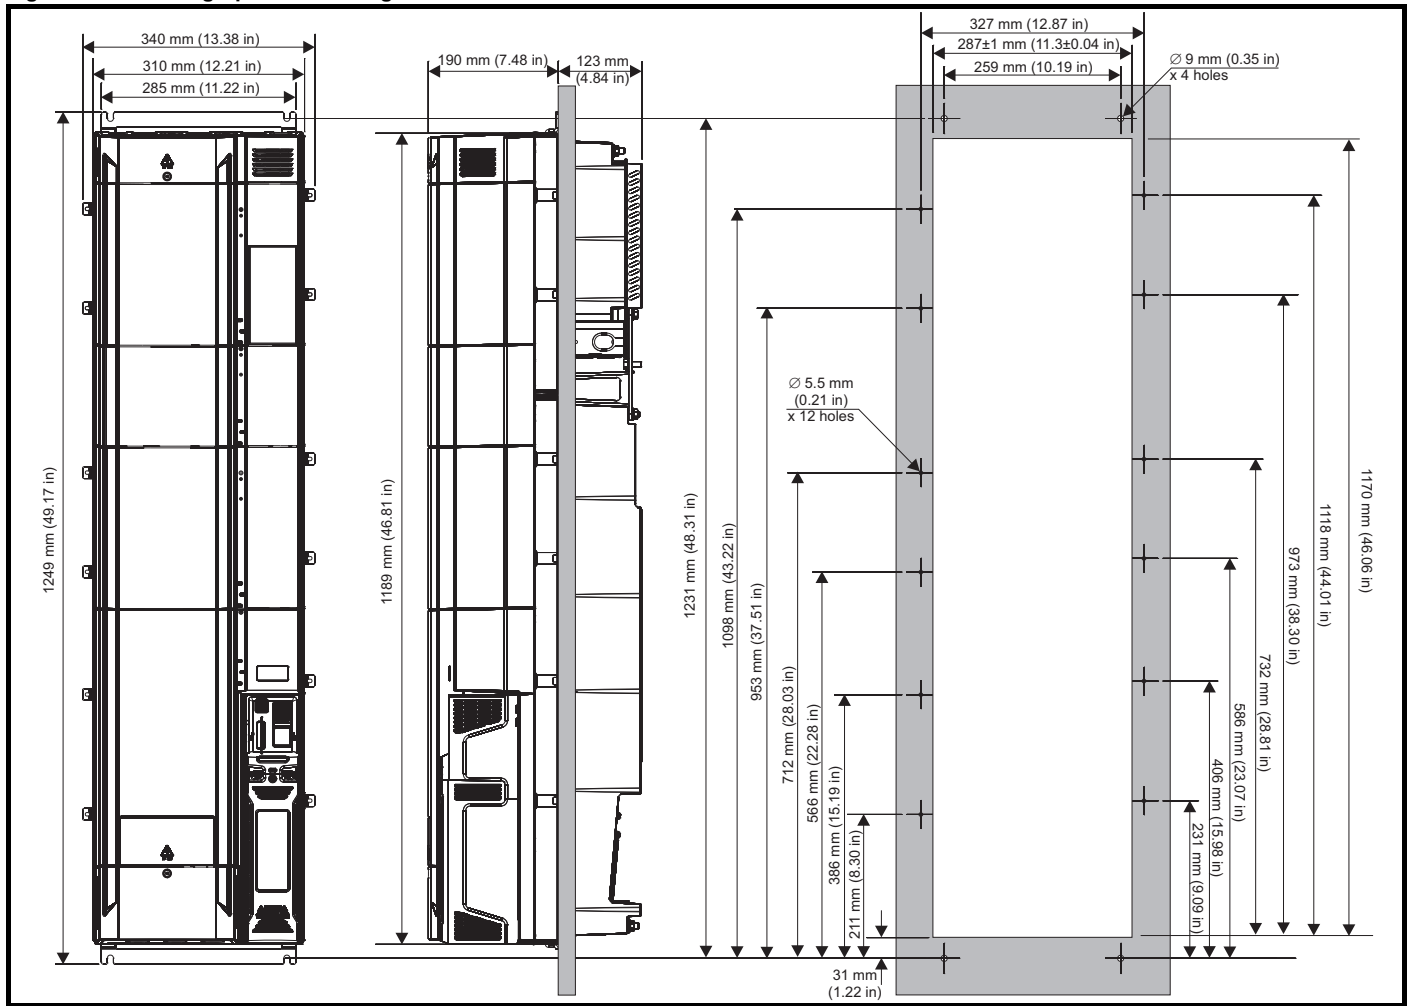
Size 3 High IP Drive and Mounting Hole Dimensions
